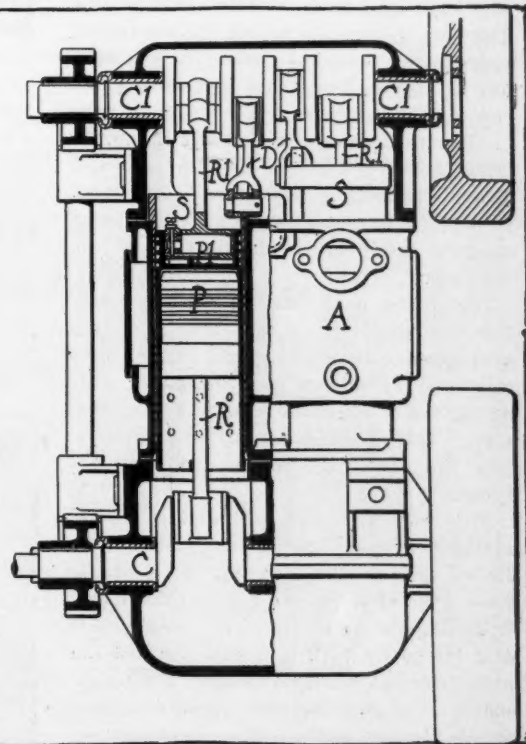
DOUBLE-PISTON SLIDE-VALVE ENGINE
